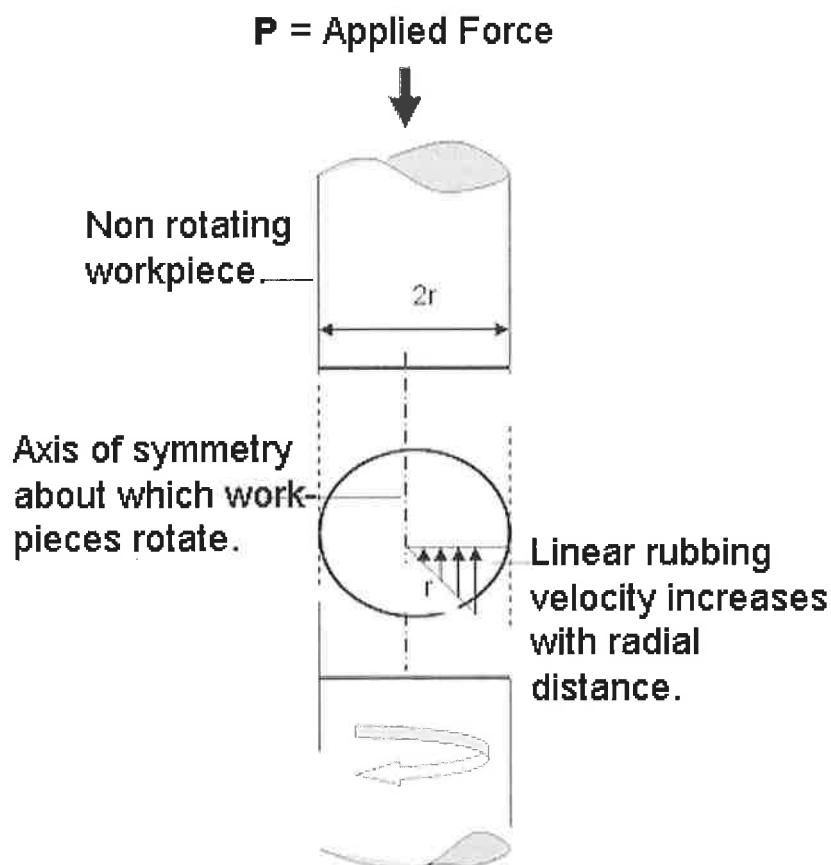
Principles governing Basic Rotational Friction Welding
